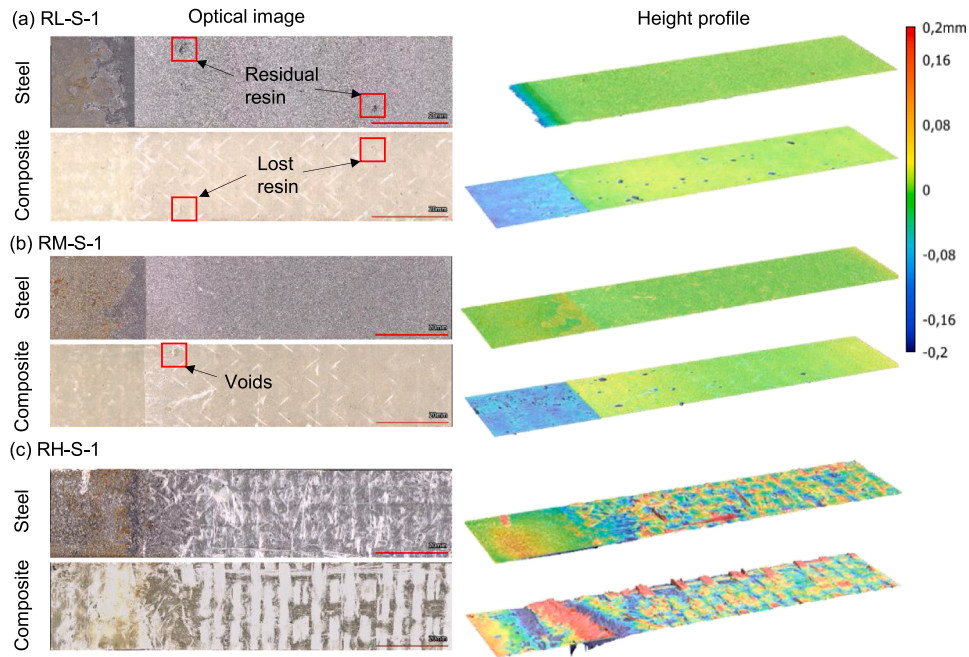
Representative fracture surfaces of static tested specimens.
